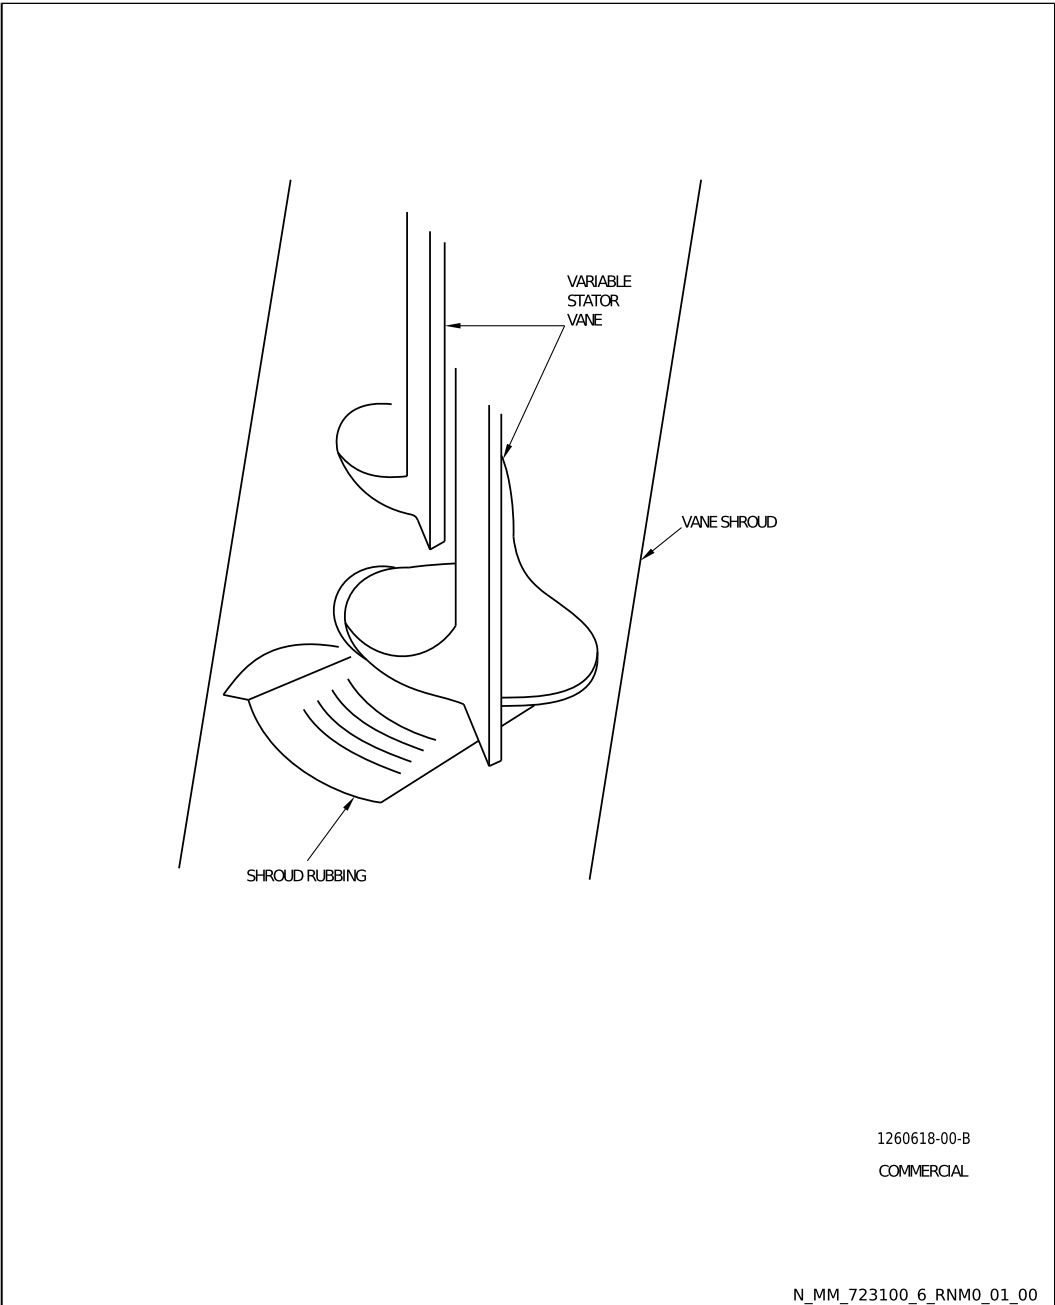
A (SHEET 2/2) - Stator Vane ID to Rotor Contact
